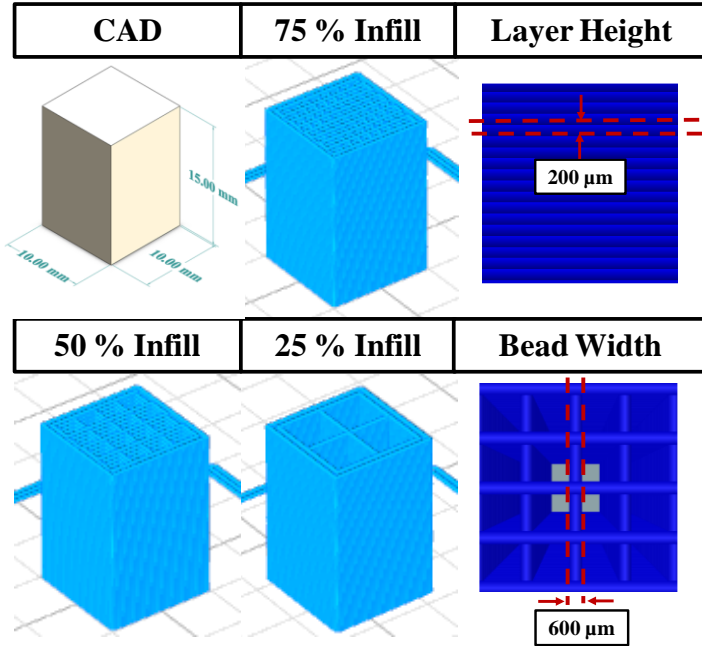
Part CAD geometry designed in SolidWorks (L×W×H of 10×10×15 mm) with sliced geometries of 75 %, 50 % and 25% infills used for 3D printing. Representative images for layer thickness and bead width set while slicing the 3D CAD model.
